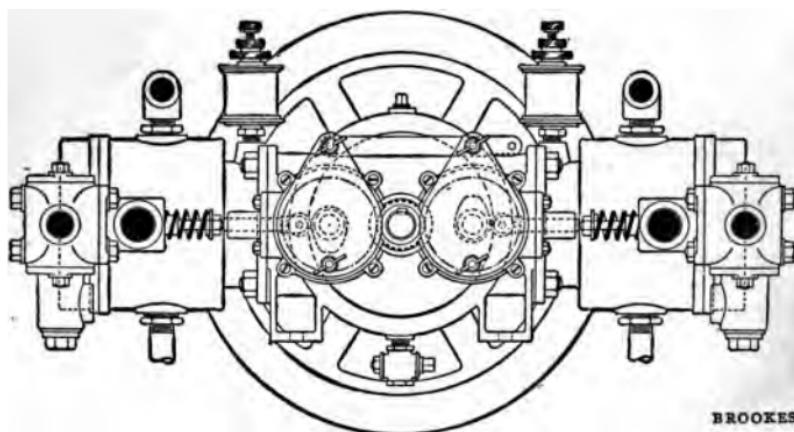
Side elevation of a two-cylinder opposed engine; showing details of valve lifting gear and inlet and exhaust ports.
